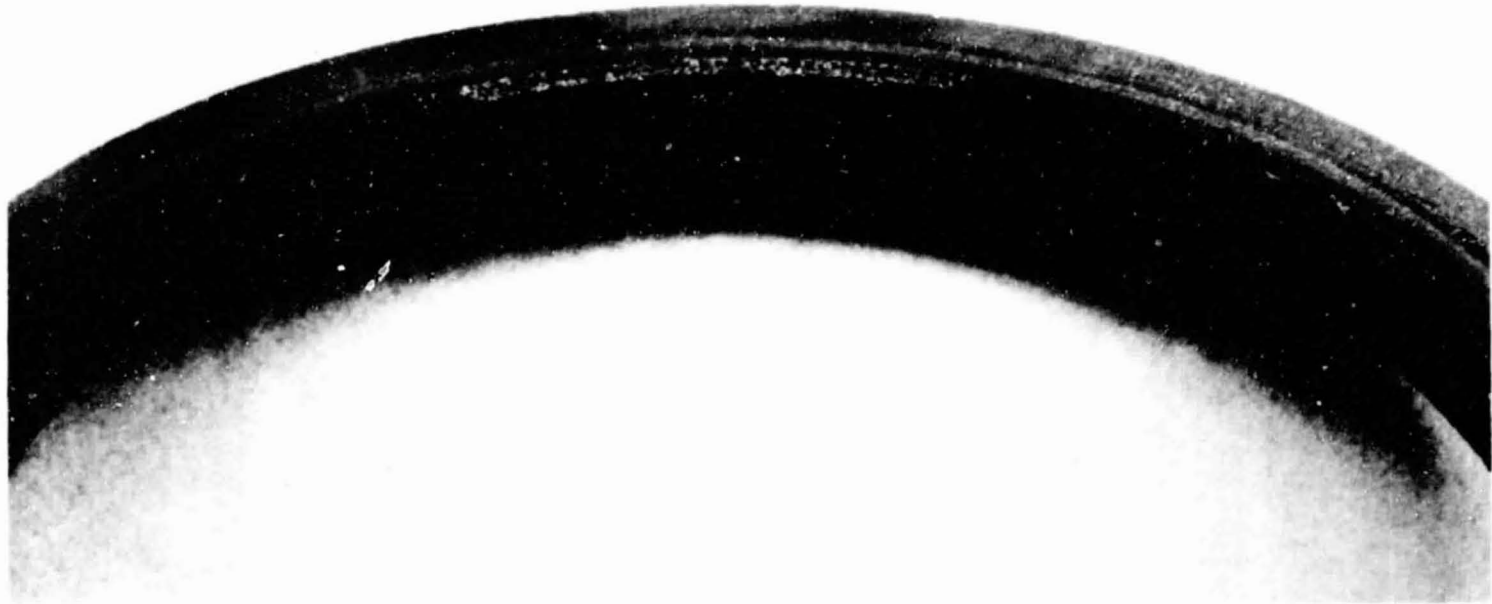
Pump End Primary Seal Ring Position 1, P/N 99RS010302,
